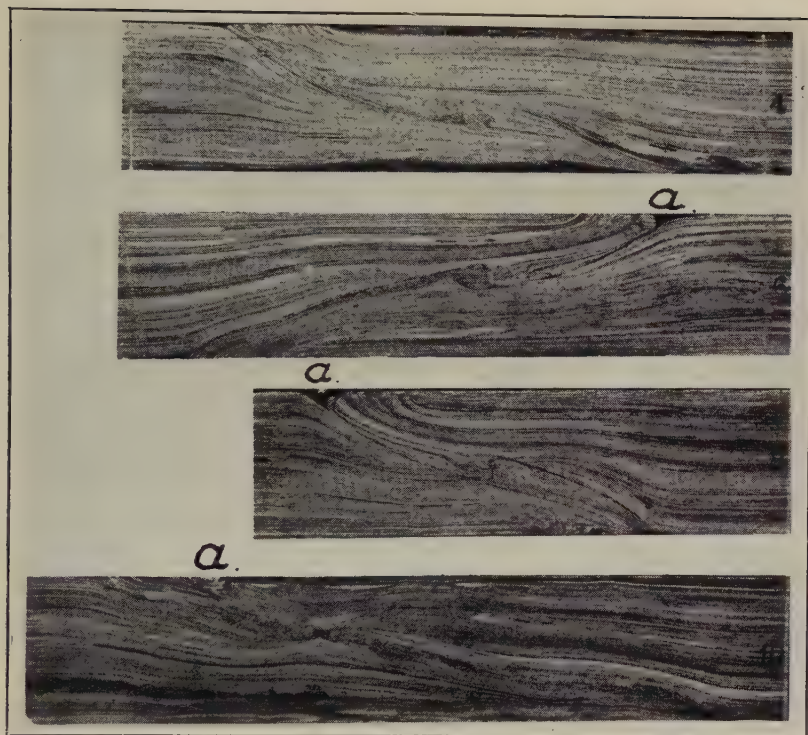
Scarf Welds Etched to Show Lines of Metal Flow and Contact Surfaces of the Weld.
